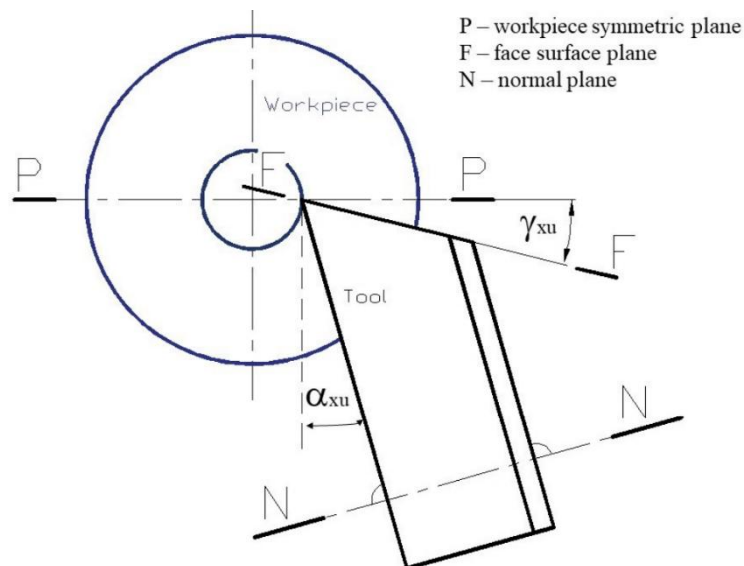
Depiction of tool rake angle and tool clearance angle [26]
